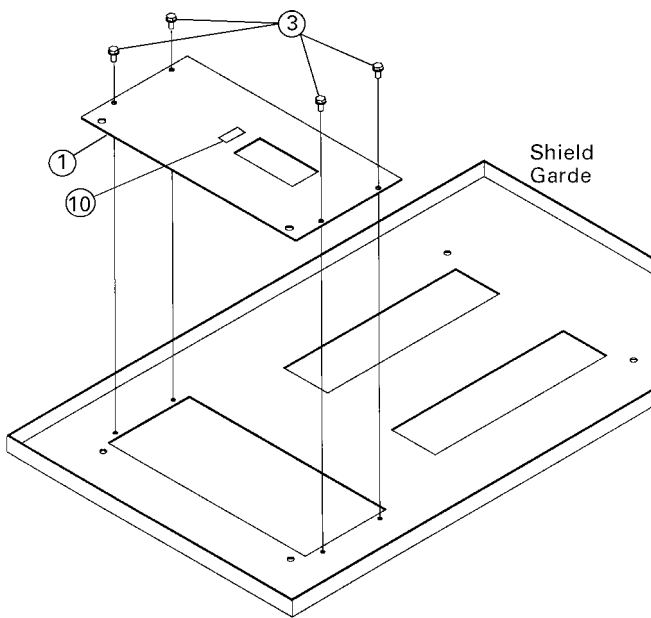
Attaching the shield insert to the shield for a main breaker installation in all panels or a subfeed breaker in 125 A or 225 A panels.
